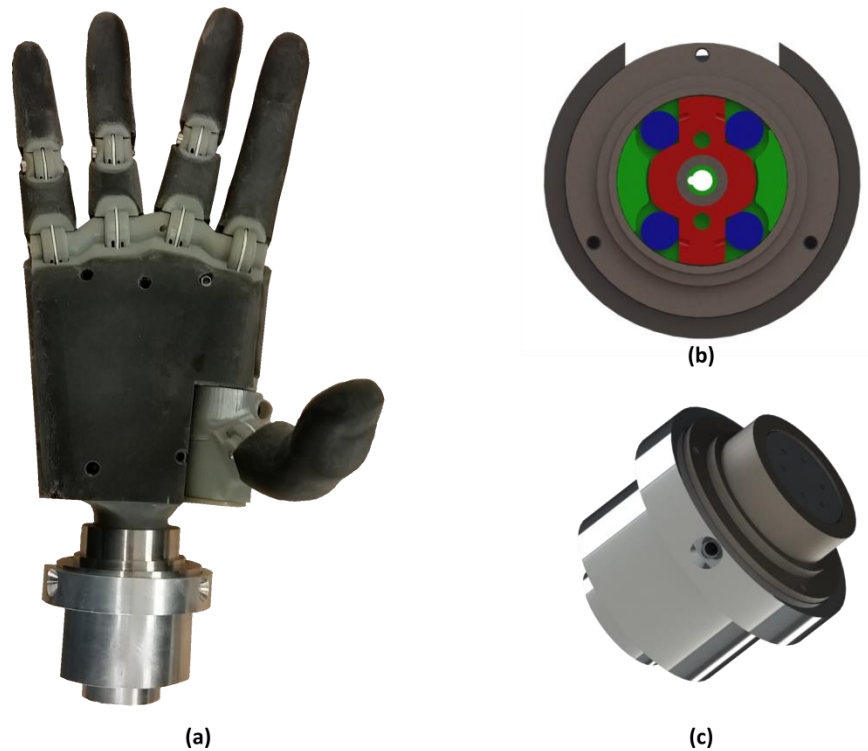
First generation of wrist prototype. (a): Photograph of wrist attached to the VMG hand. (b): CAD model of cross-section of two-way clutch mechanism. (c): CAD model of first generation wrist.
